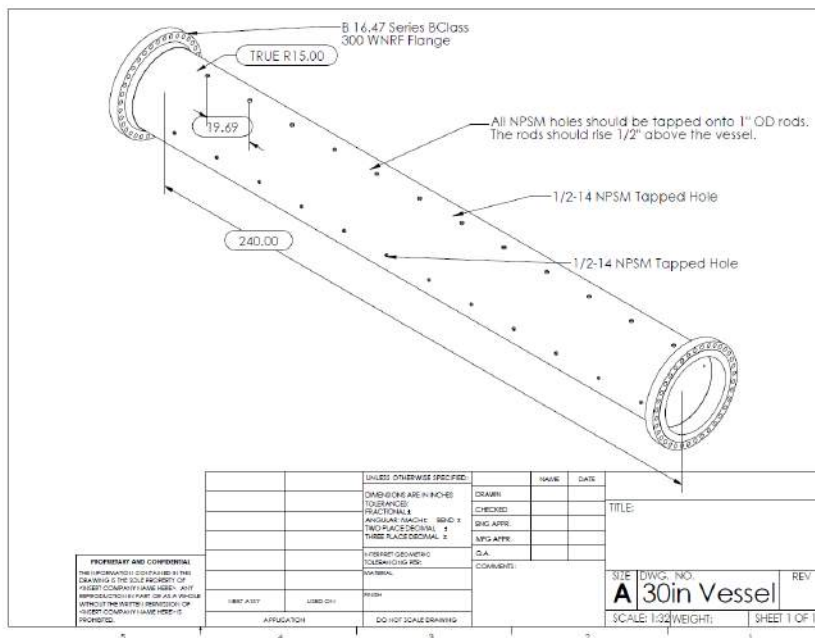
Two-dimensional CAD drawing of the explosion pressure flame reactor
